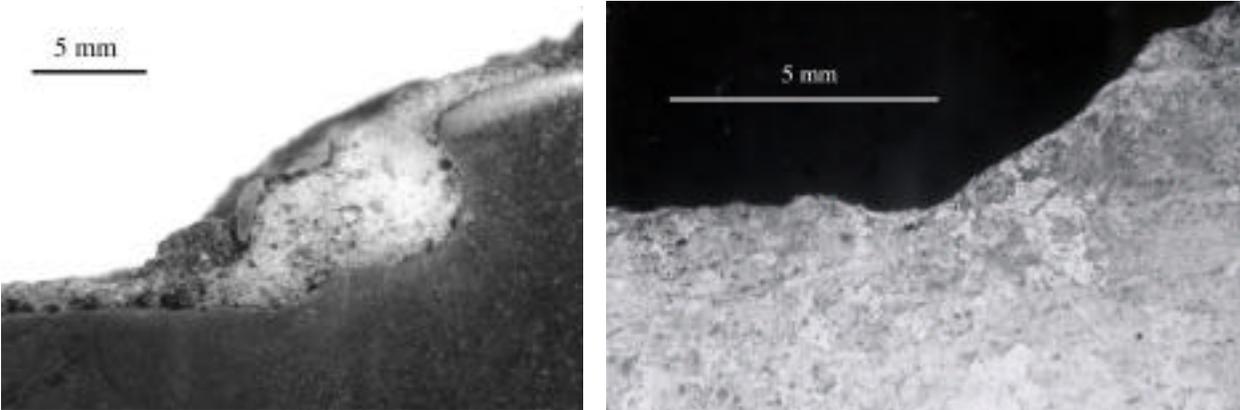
Weld toe at web-to-toe fillet of modified thermite weld. Left: lower magnification macro-photograph. White material is fused sealant. Right: higher magnification view showing a reduced flank angle and a reasonably smooth surface at the weld toe.
